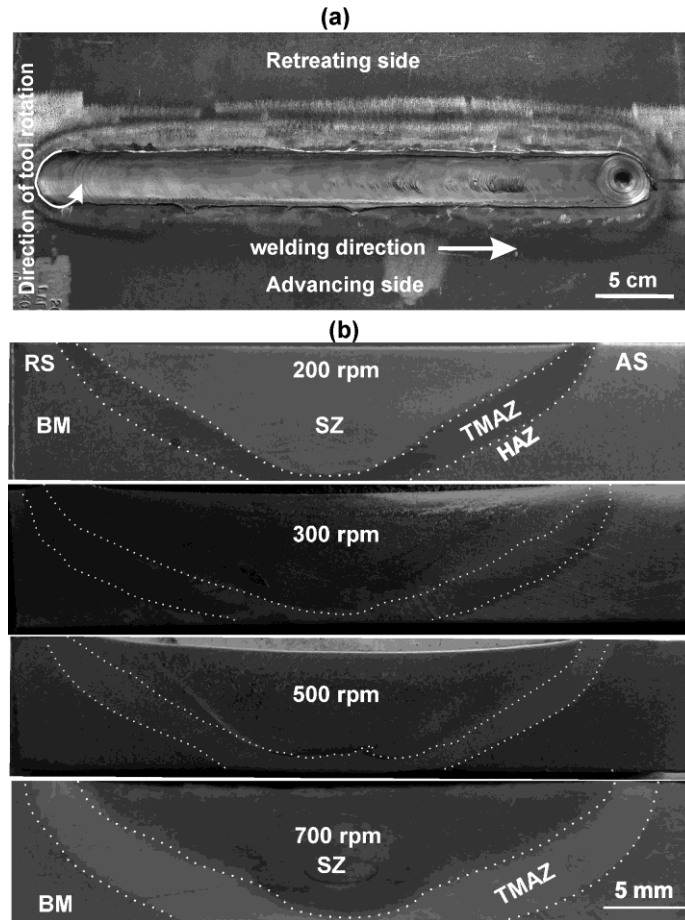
(a) Macrograph of bead- on- plate friction stir weld at 700 rpm describing advancing side (AS), retreating side (RS) and direction of tool rotation.(b) Macrographs of transverse cross section of FSW samples.
